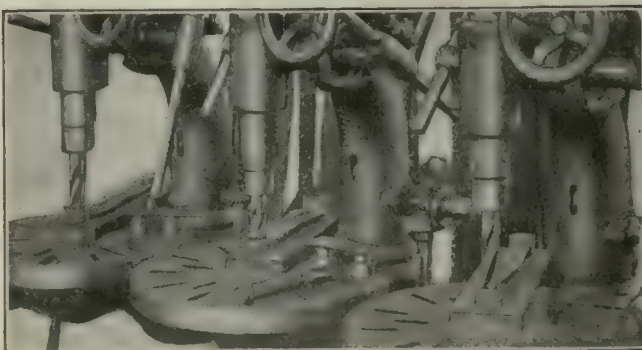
FINISHING HOLES IN CONNECTING-RODS
